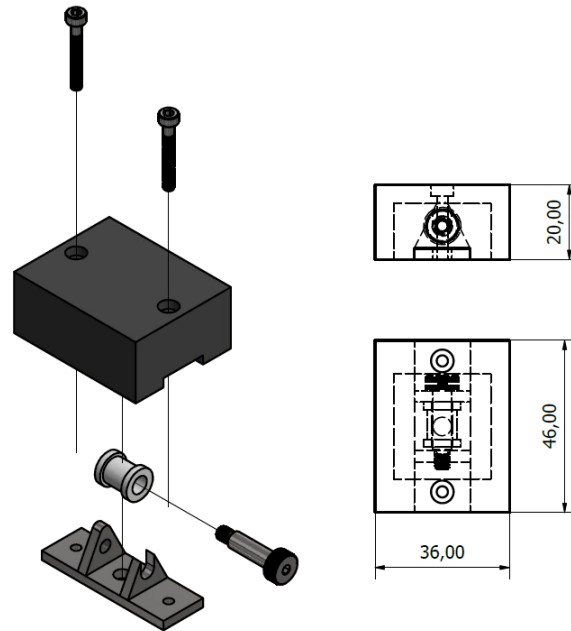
Views of the Mirnov coil and graphite shield assembly in millimeters.
